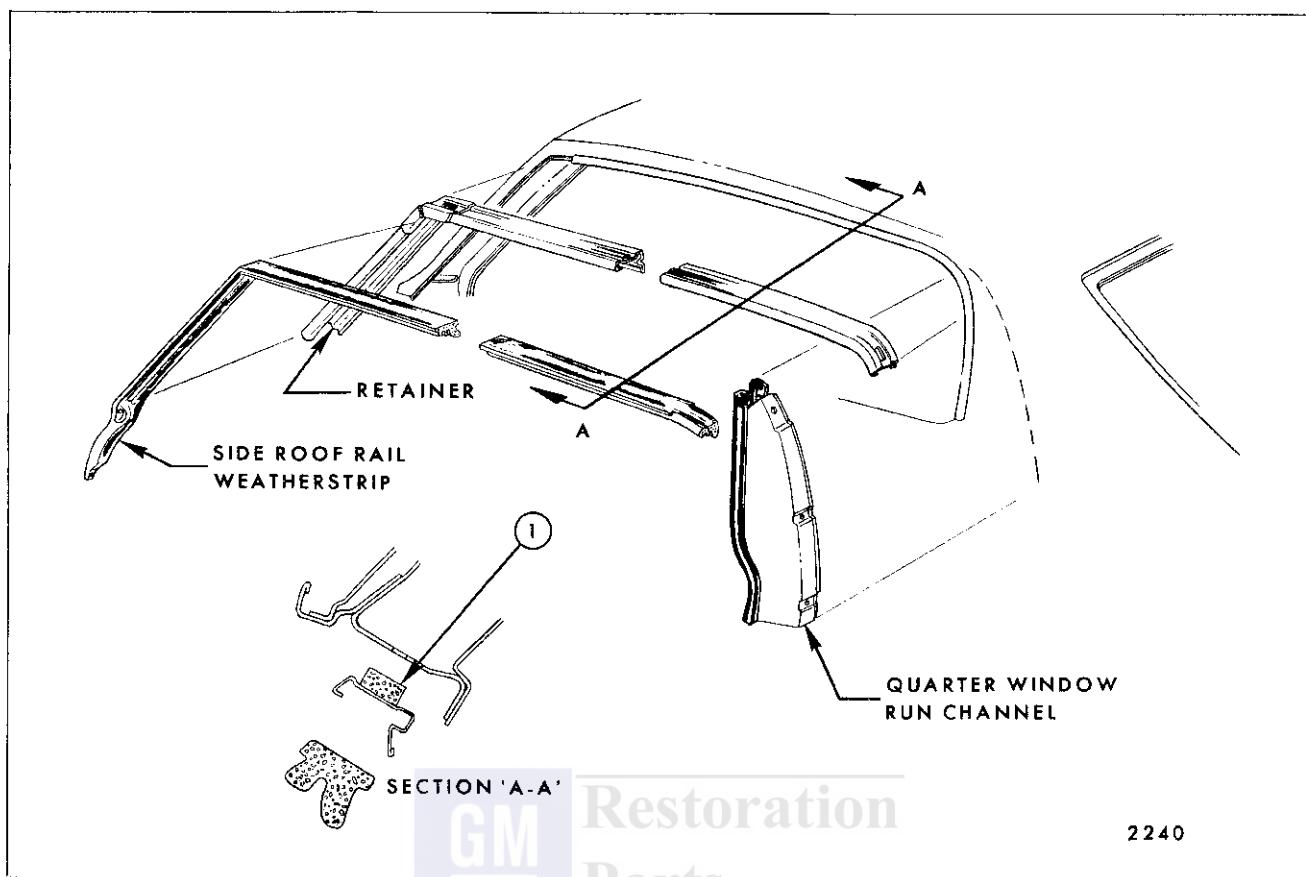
Side Roof Rail Weatherstrip and Retainer "B & C-47" Styles
